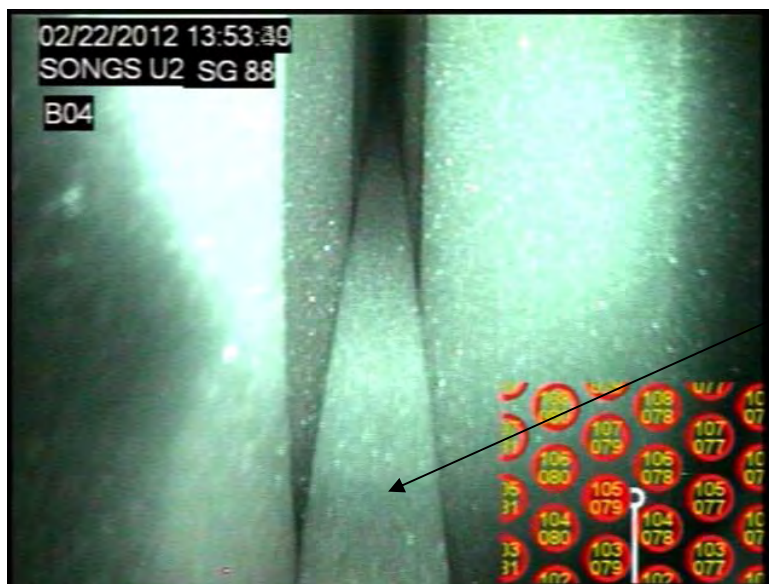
Tube Bundle Visual Inspection Image [Unit-2B]
